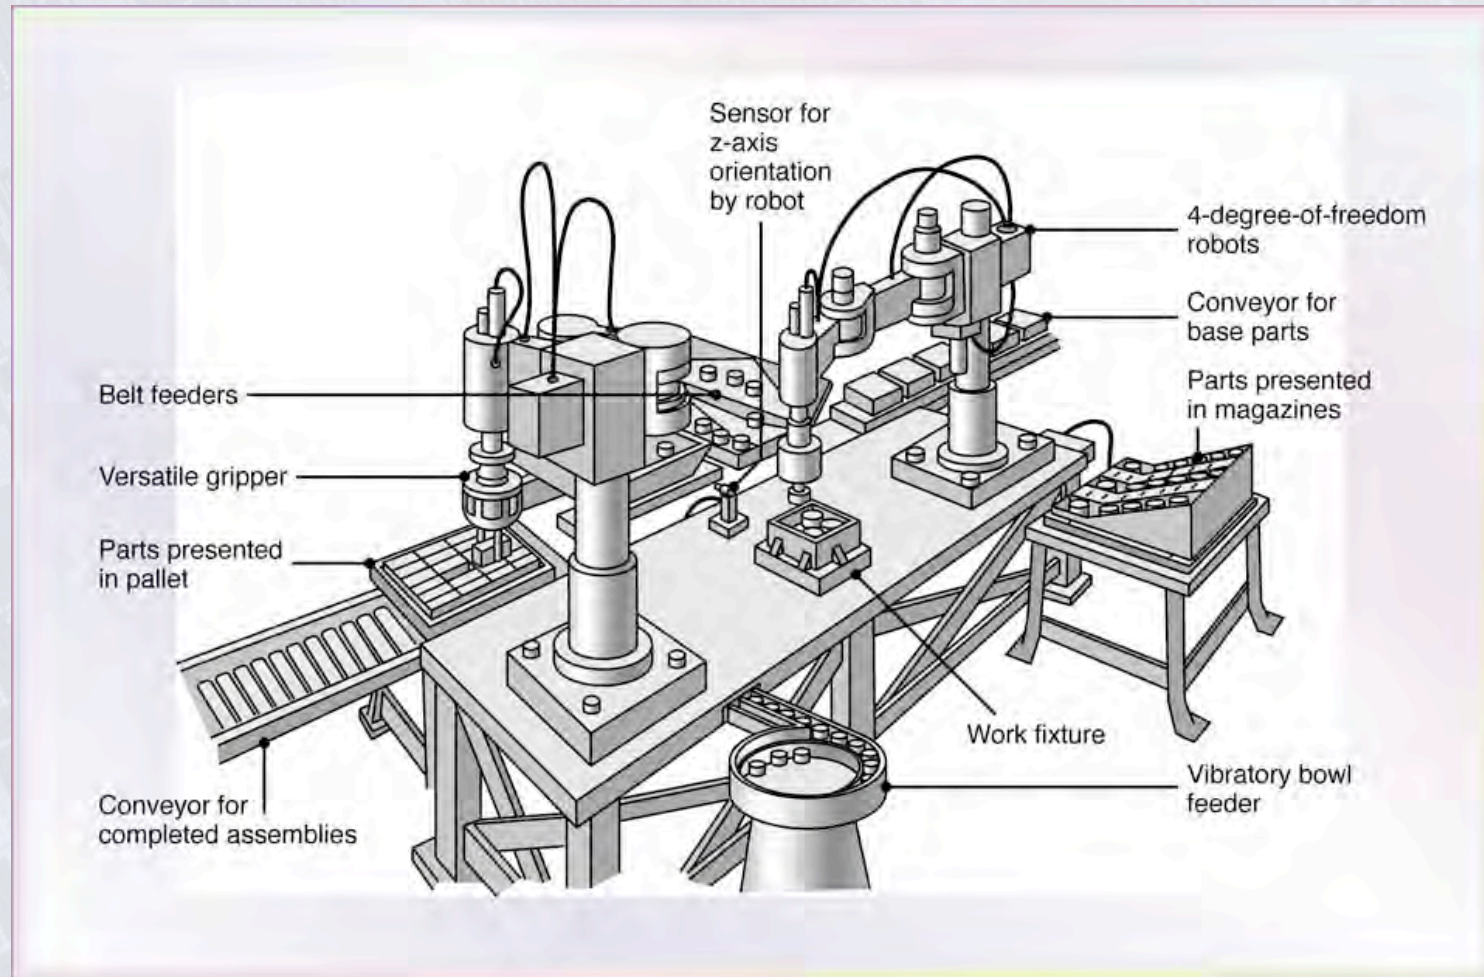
A two-arm robot assembly station. *Source: Product Design for Assembly, 1989 edition, by G. Boothroyd and P. Dewhurst. Reproduced with permission.
